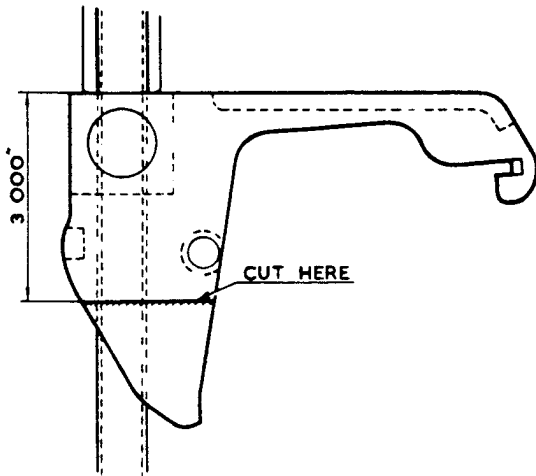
MODIFICATION TO SPRING COMPRESSING TOOL.
